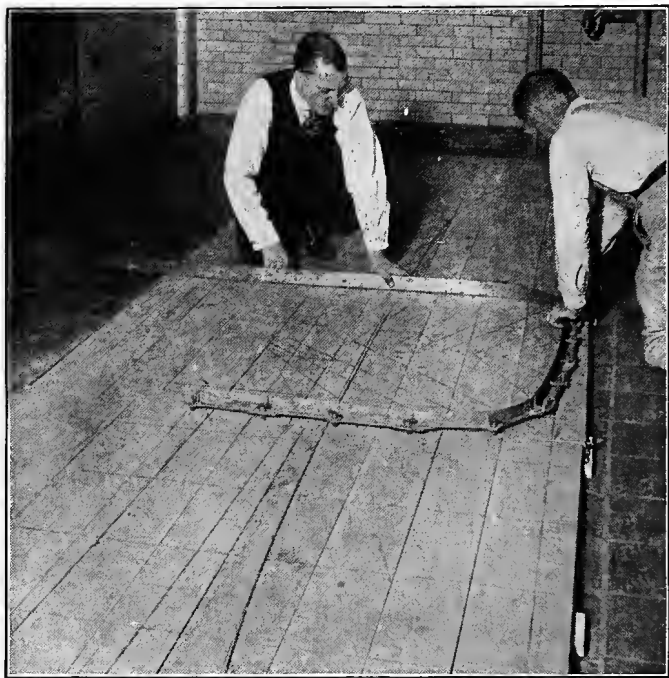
Picking Up Lines from Mould Loft Floor with a Flexible Steel Template.
